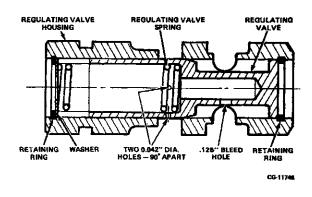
Revised Oil Pressure Regulating Valve Assembly
